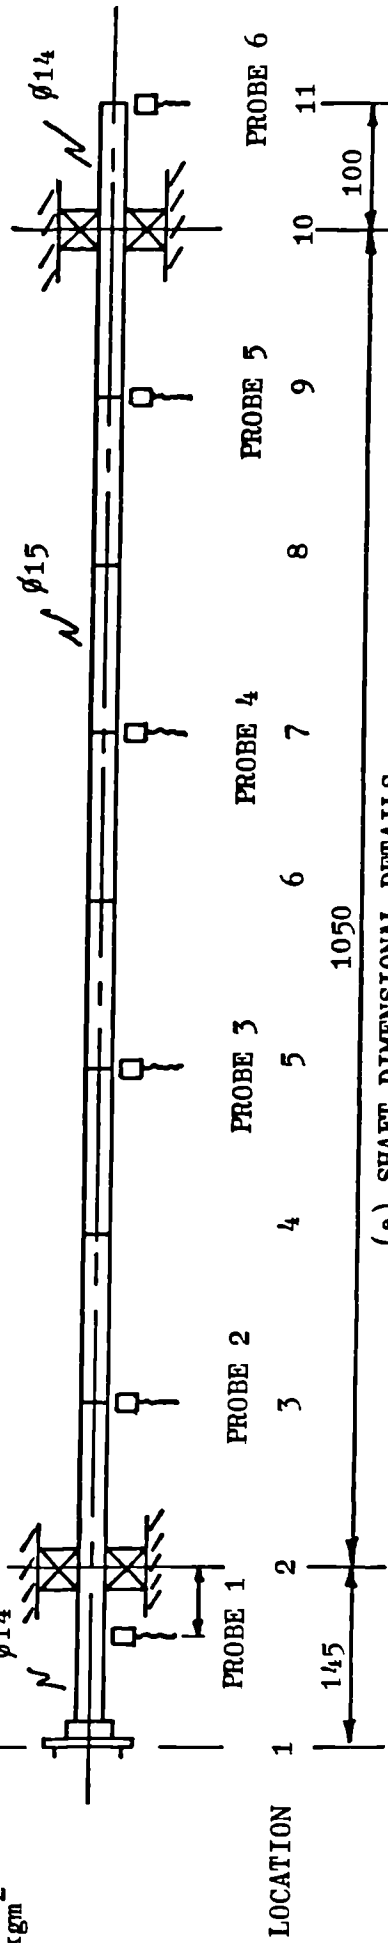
TEST SHAFT COUPLING ARRANGEMENT
